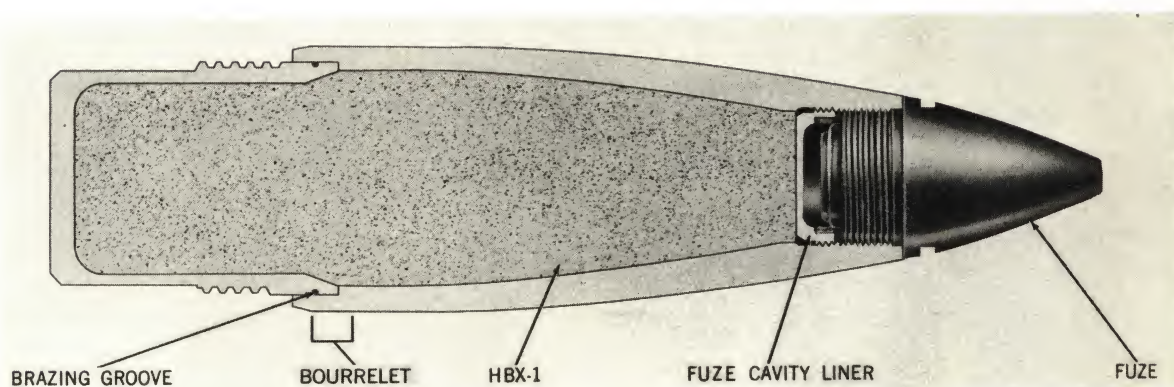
2.75-Inch Rocket Warhead Mk 1 Mod 5 (HE), Sectional View.
